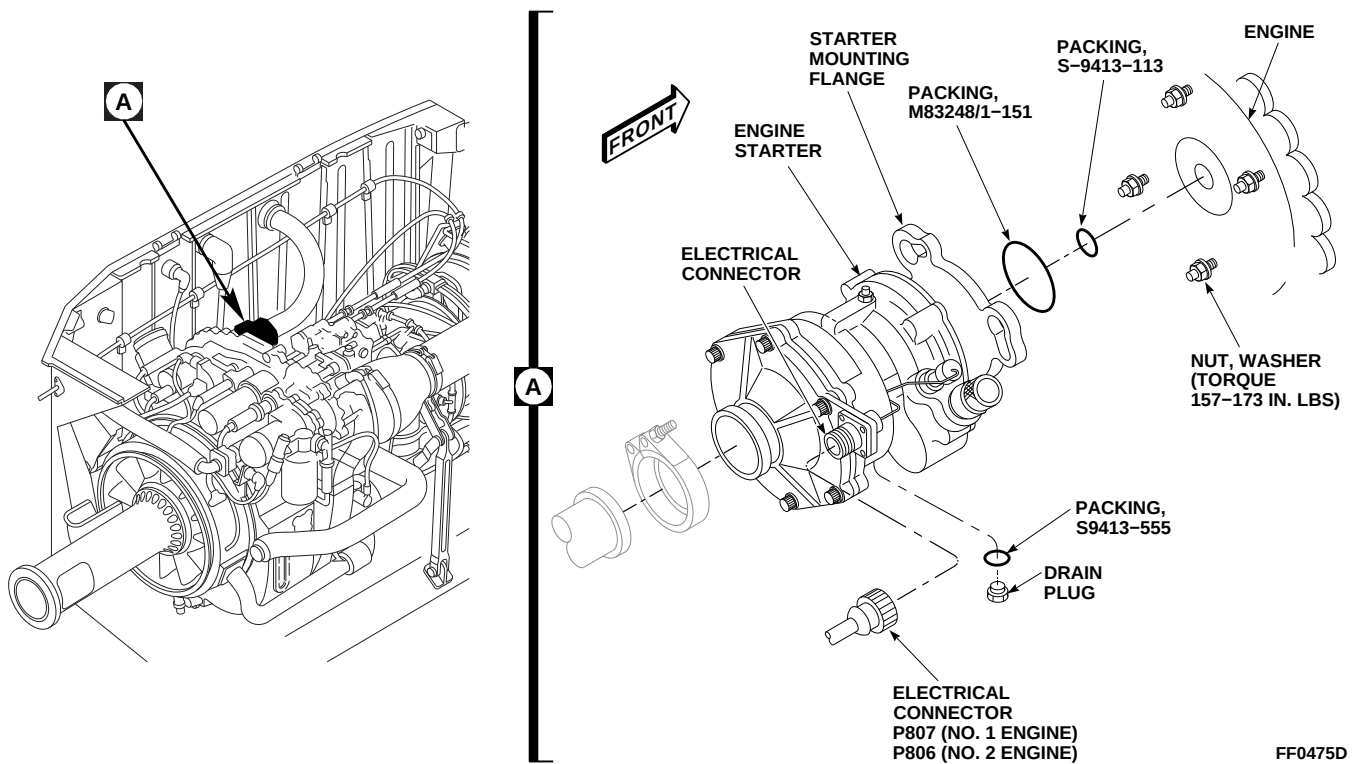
REPLACE ENGINE STARTER
